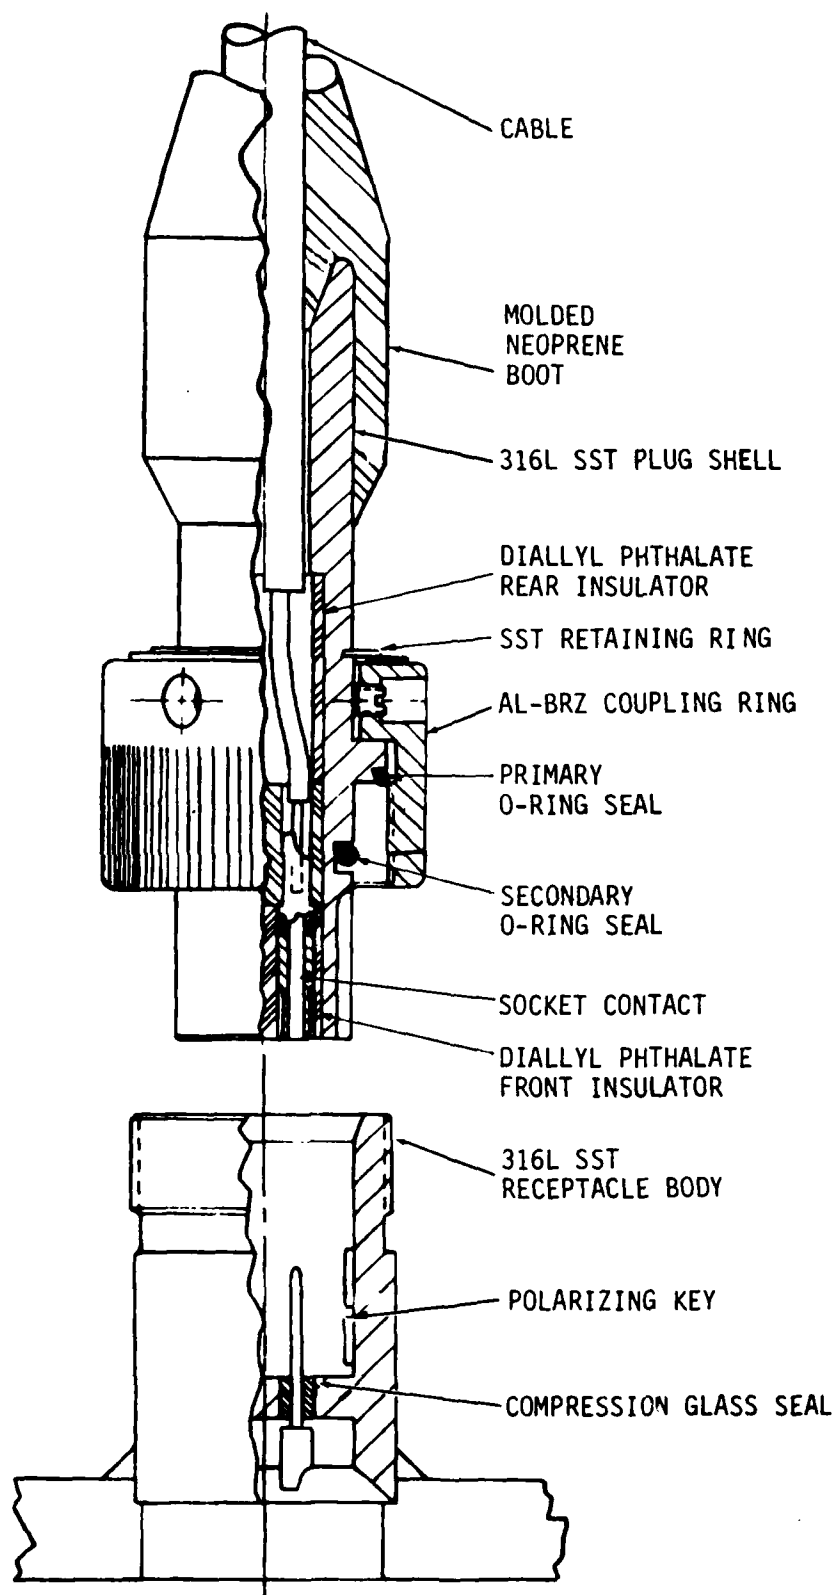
MIL-C-22539 CONNECTOR ASSEMBLY
